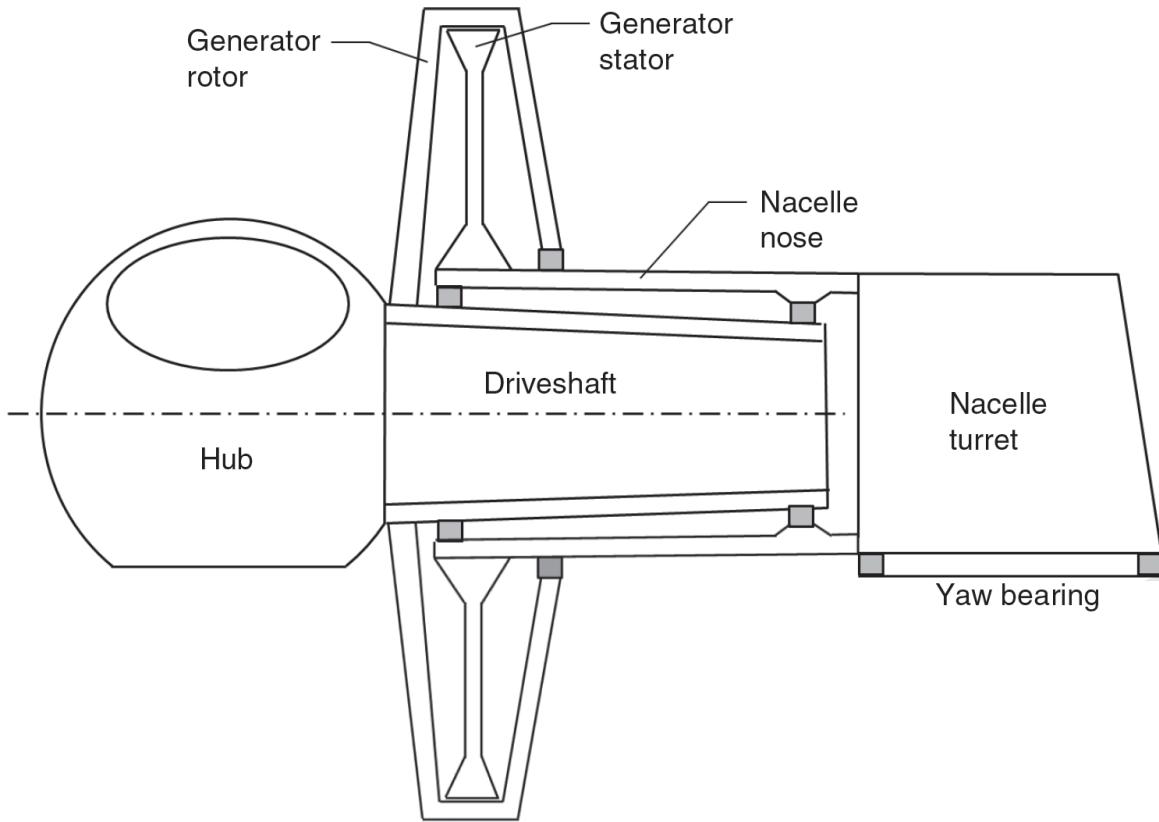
A sketch of the Nacelle layout of the 10MW direct drive wind turbine; not to scale with structural details omitted. Blades(not shown), hub, driveshaft and generator rotor rotate. Bearings are shaded grey.
